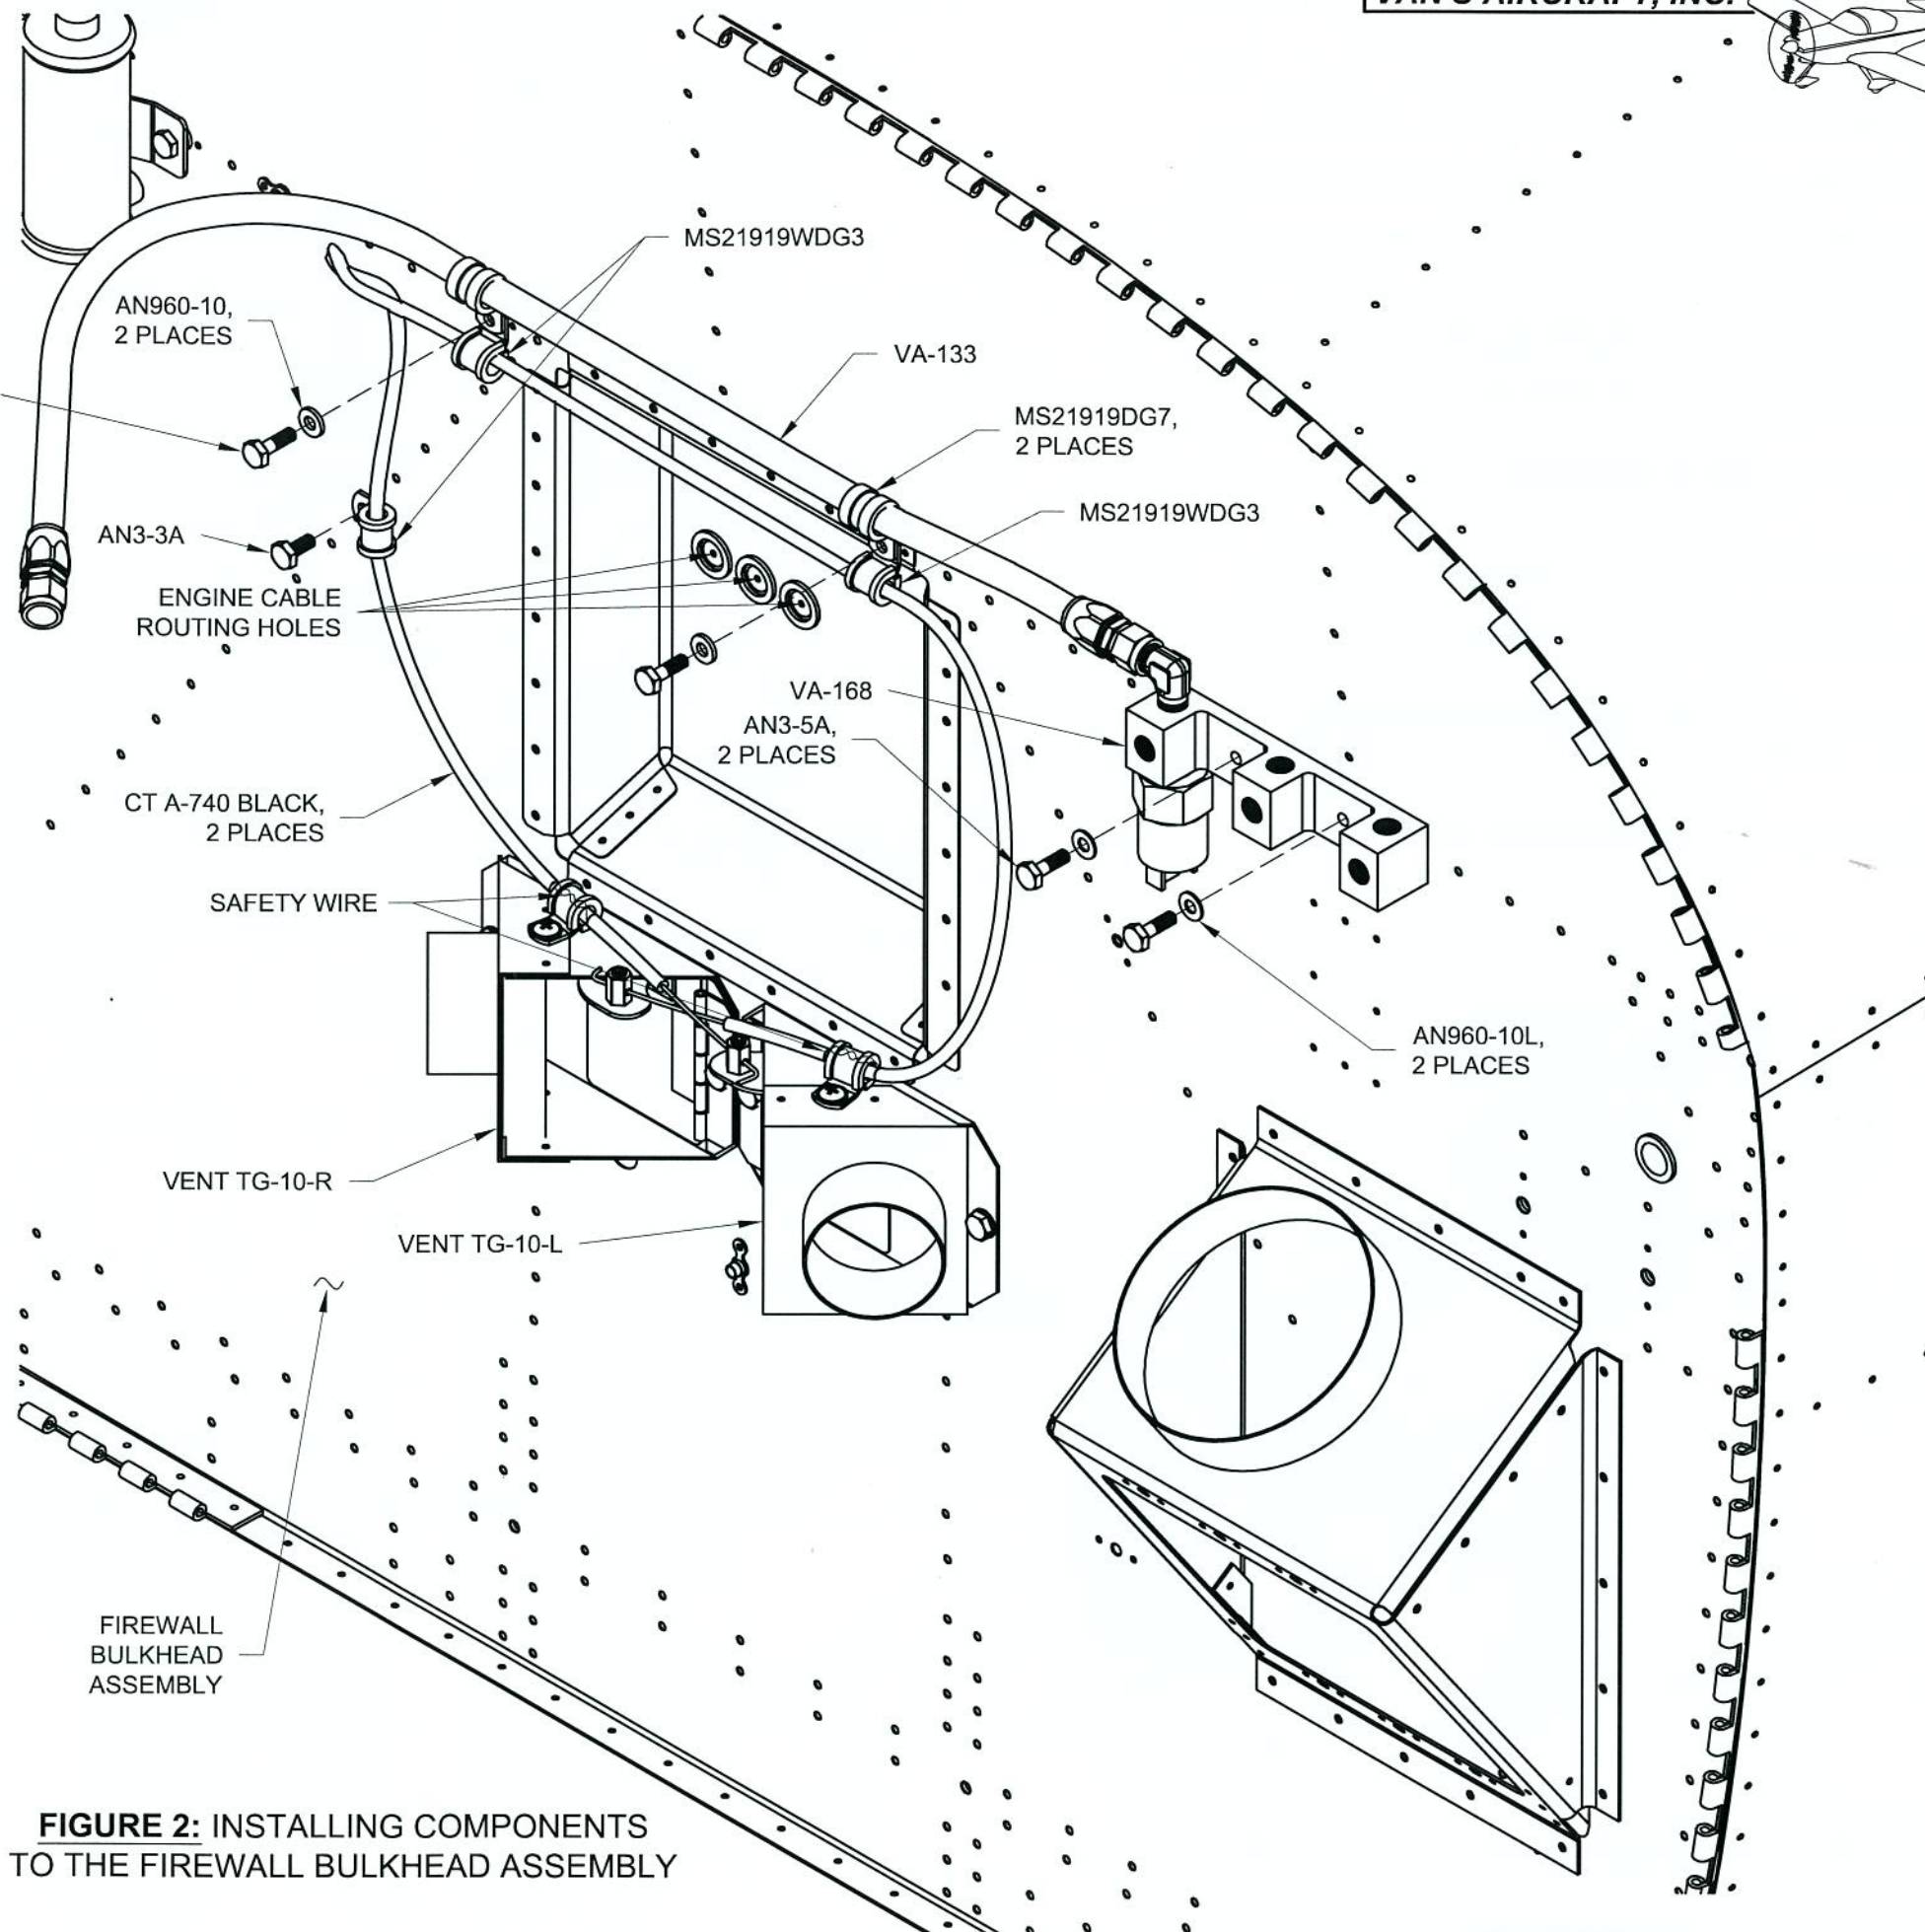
INSTALLING COMPONENTS TO THE FIREWALL BULKHEAD ASSEMBLY
